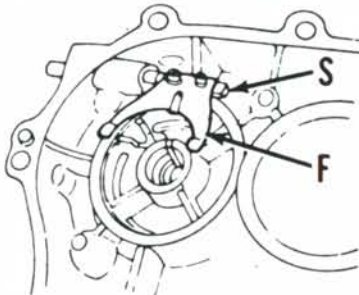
Install governor fork (F) on governor shaft (S) of MF260 models with pads on fork ends towards camshaft.
